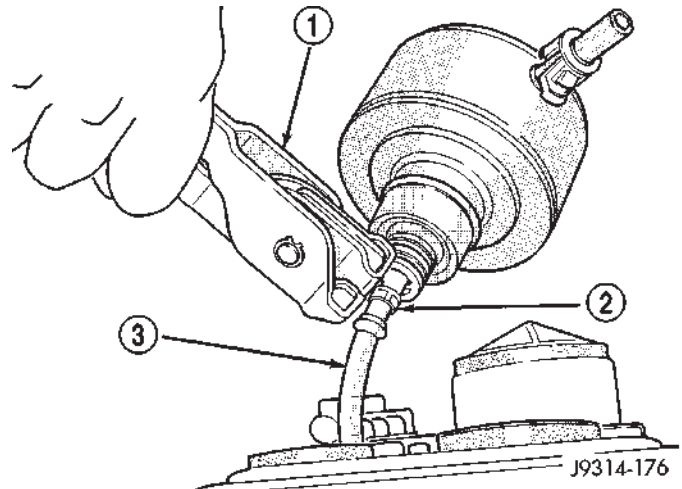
Tightening Fuel Tube Clamp—TYPICAL
